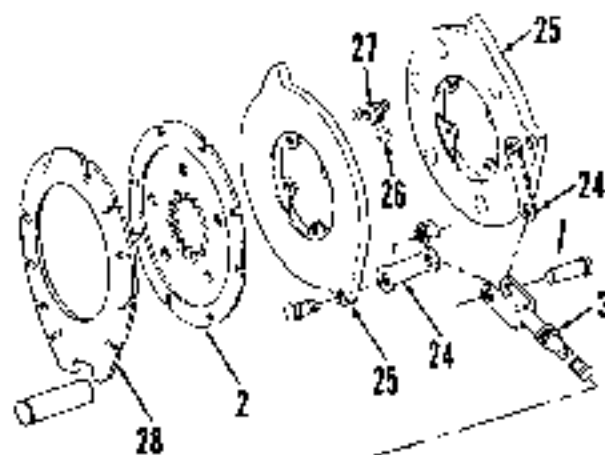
Exploded view of wet type brakes used on some Orchard models and all MF250 models. Except for intermediate plate (28), refer to Fig. 163 for legend.
